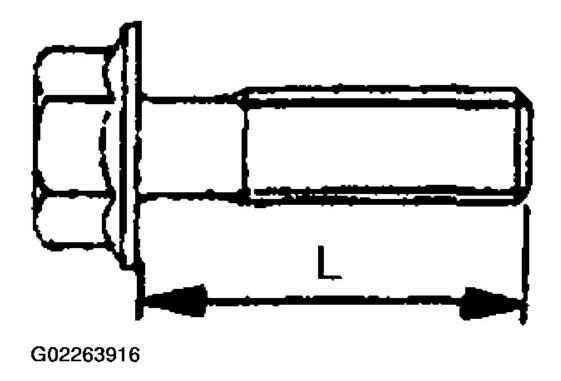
Identifying Bolt For Fixing Special Tool To Crankshaft Pulley Courtesy of SUZUKI OF AMERICA CORP.
